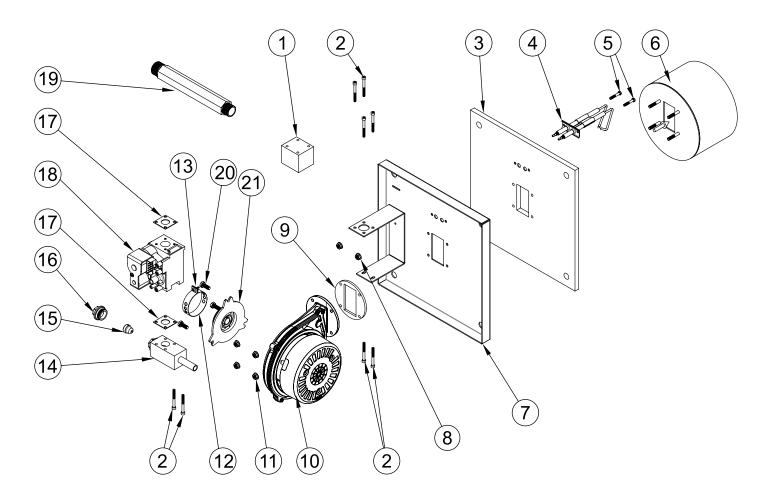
Exploded view of burner for Eolo mod. BC / NBC 15 \div 65 RT
